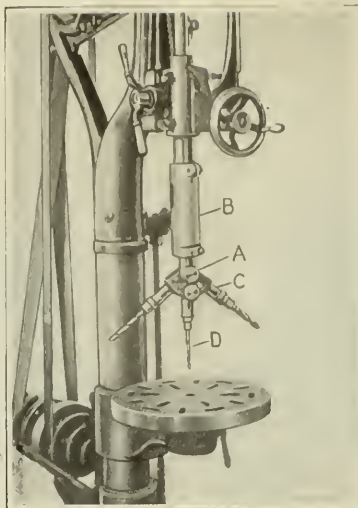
Eisler Drill Press Turret Head with Sleeve Connection to Spindle
